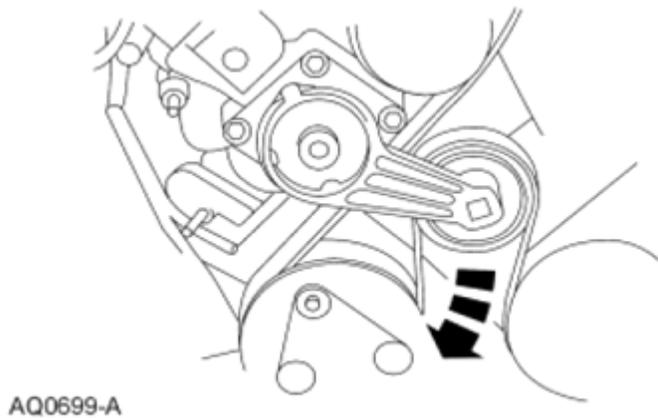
Rotating Tensioner Clockwise To Drive Belt
